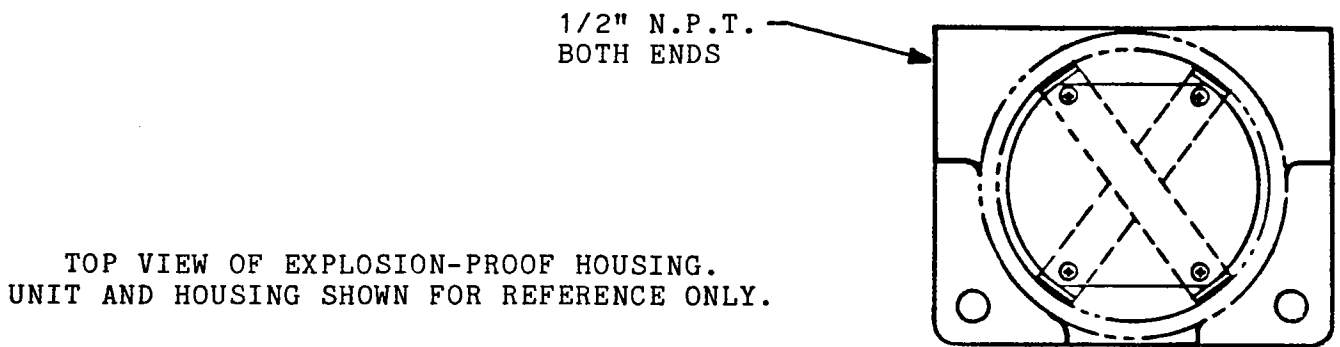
Spring Retainer for Explosion-Proof Housing
